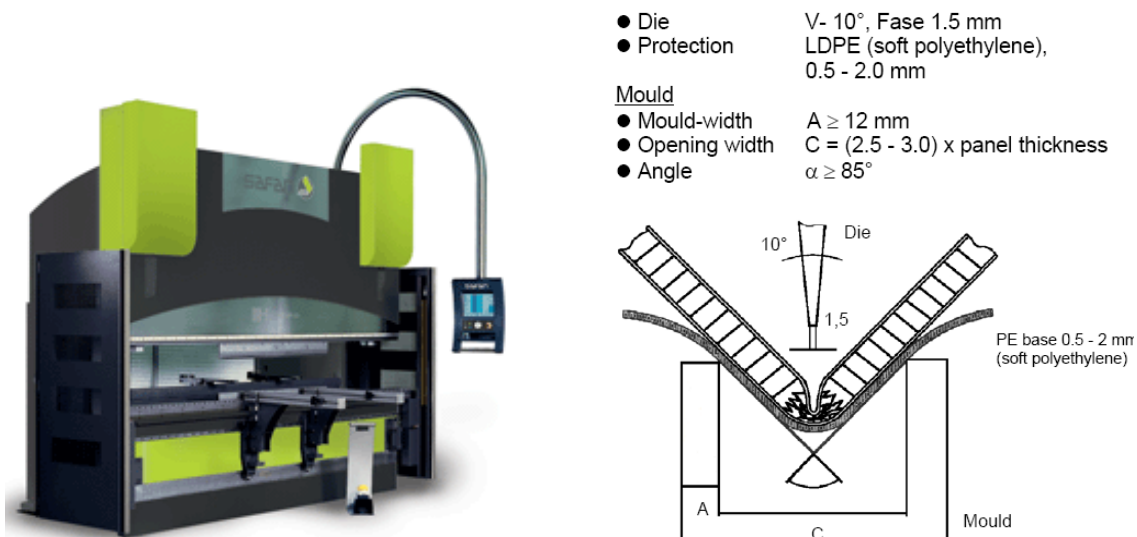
SAFAN hydraulic press brake with ALCAN bending instructions
